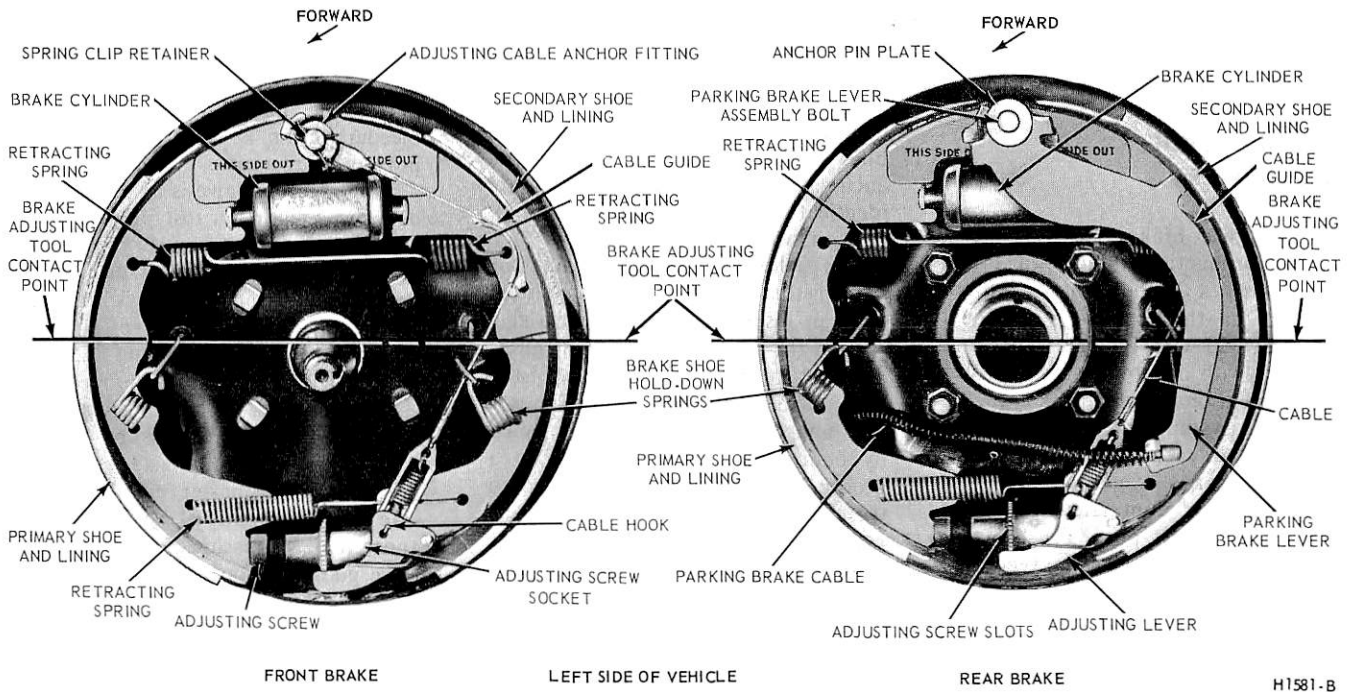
Self Adjusting Brake Assemblies — F-250 Series
